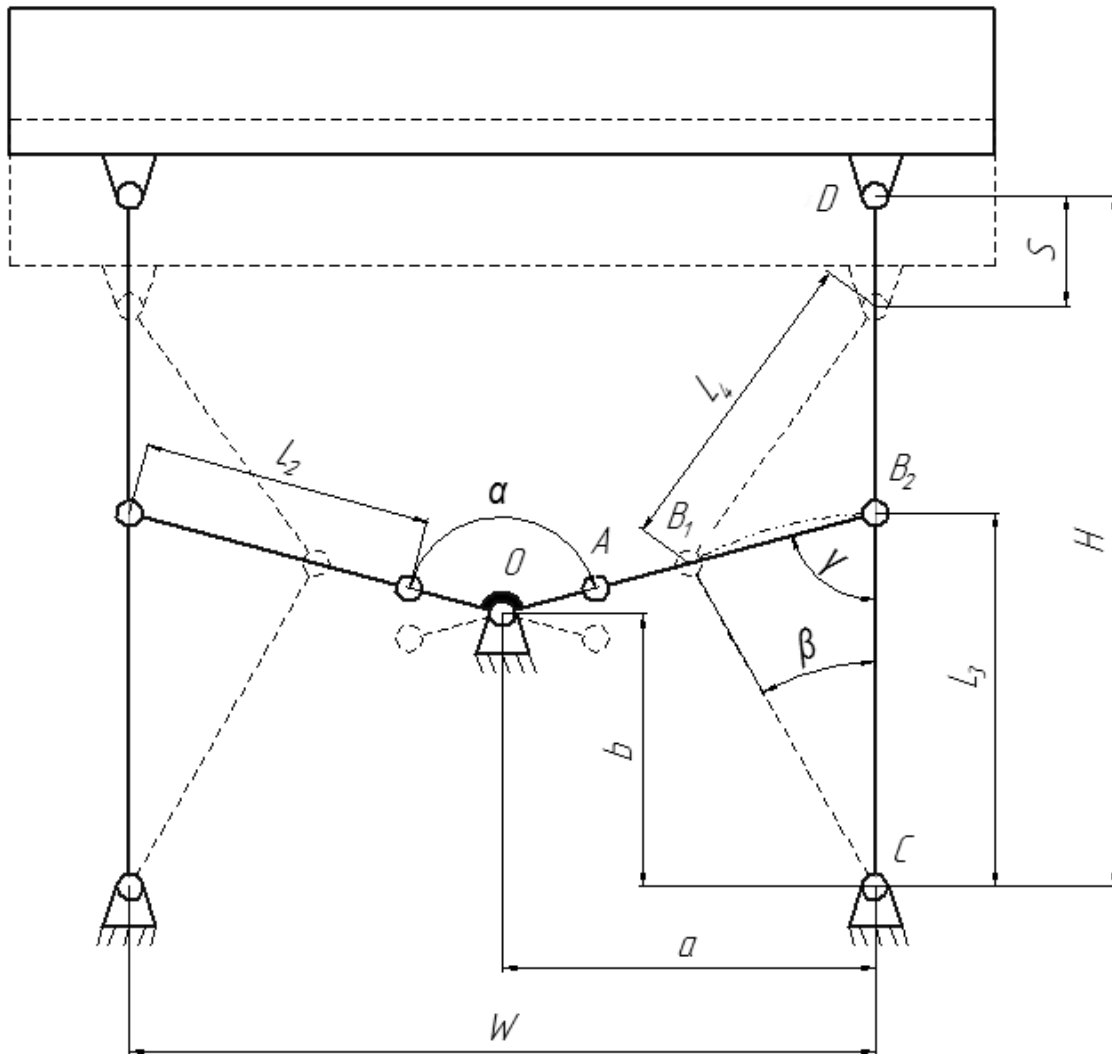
Calculation scheme of mechanism / Розрахункова схема механізму
